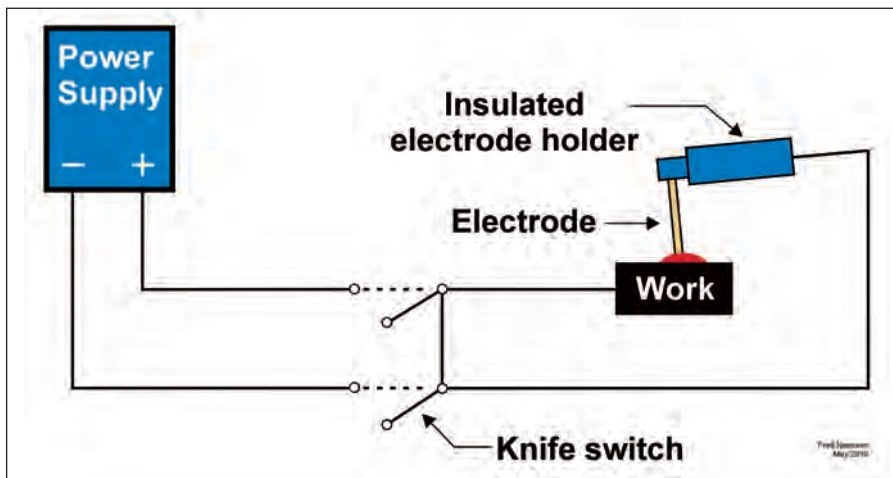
A basic electrical equipment setup for underwater welding with SMAW. (Courtesy of Fred Neessen.)
